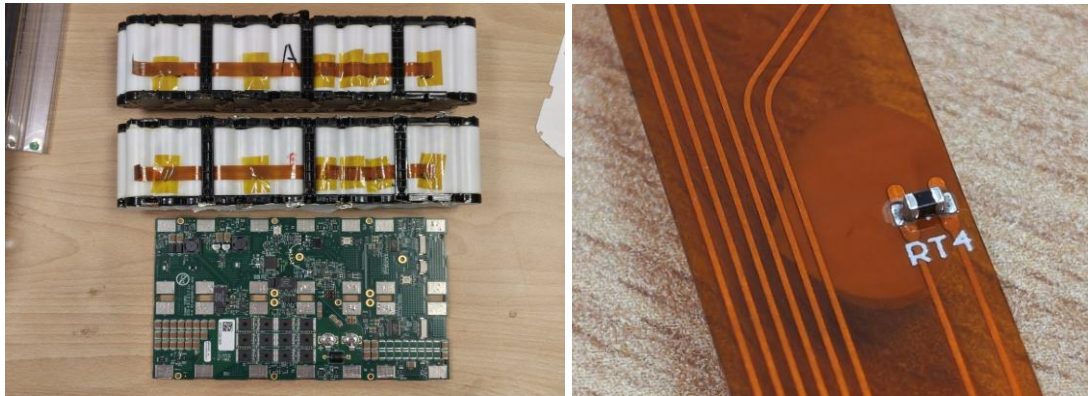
Fully separated module, close-up of single NTC thermistor on flex PCB.
